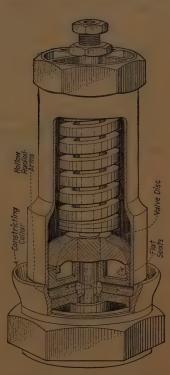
Locomotive type of Crosby spring-loaded safety valve.
